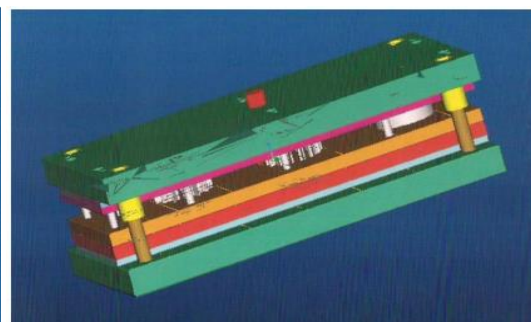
Final Assembly of the Press Tool for Stator Lamination
